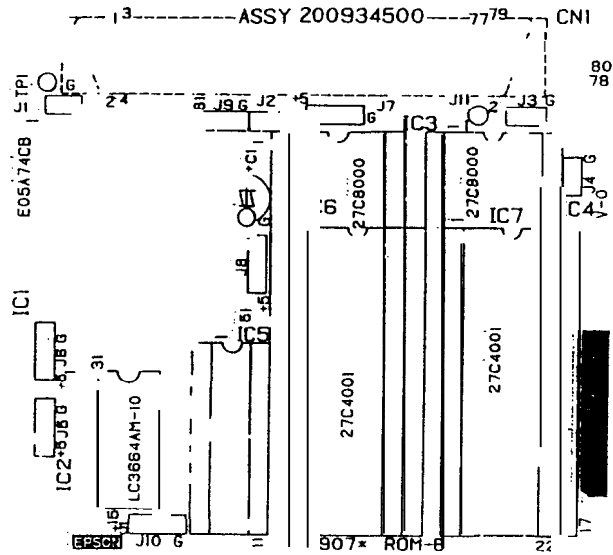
C82907* ROM-B Board Component Layout (Front Side)
